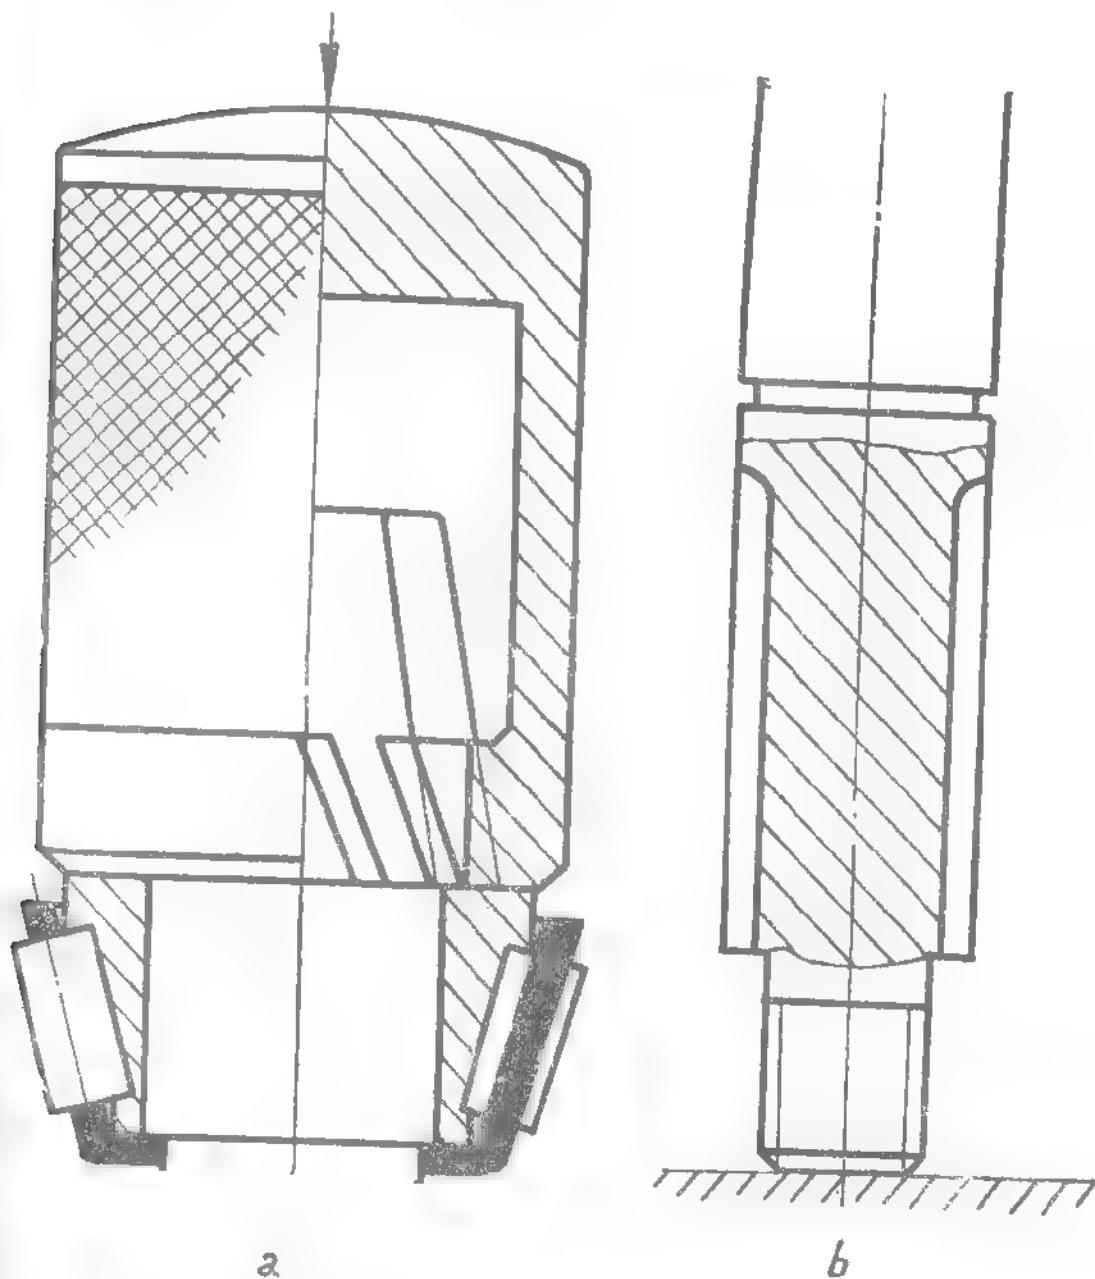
115. EXTRACTING DRIVE PINION REAR BEARING INNER RACE
